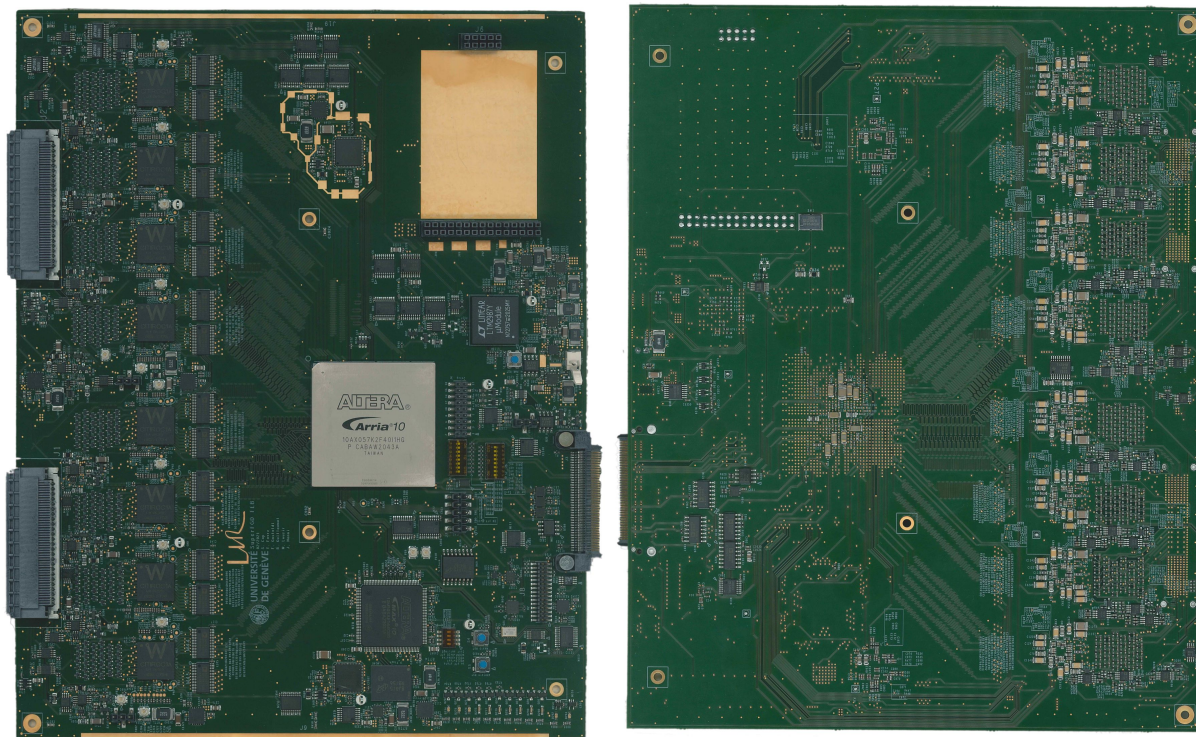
Top (left) and bottom (right) view of the Super-FGD Front-End-Board prototype
